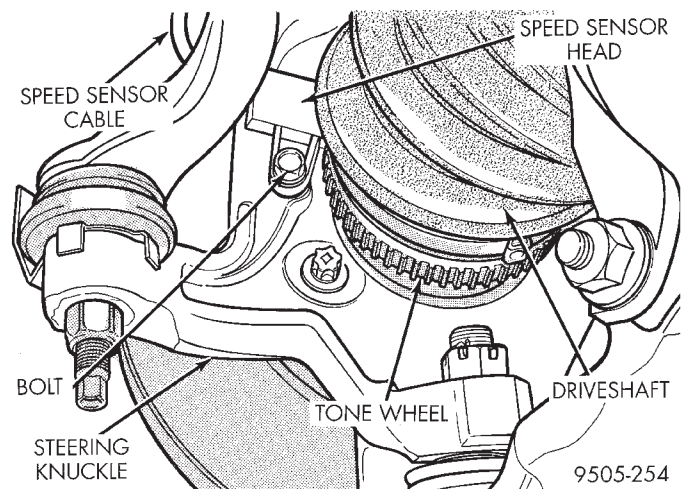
Speed Sensor Head Attachment To Steering Knuckle
